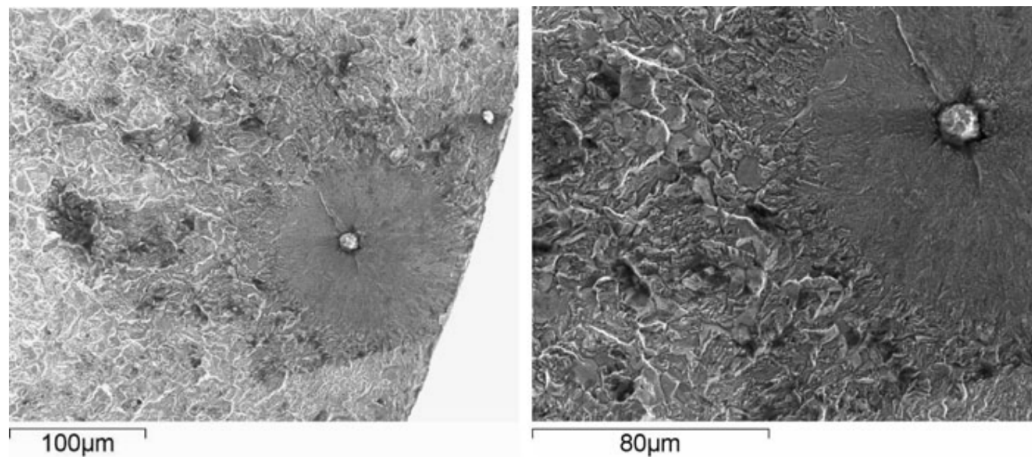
Typical fracture surface of a fish-eye crack, which formed at a non-metallic inclusion within a cylindrical test specimen of steel SNCM439, taken from [55].
